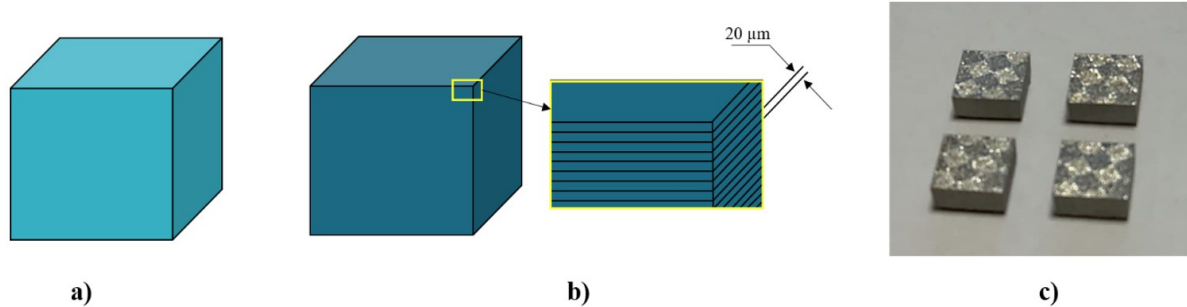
4. Operation sequence for manufacturing of the SLM specimens: a) schematic of the STL-3D design, b) division of the 3D design into layers for SLM fabrication process, and c) final components.
